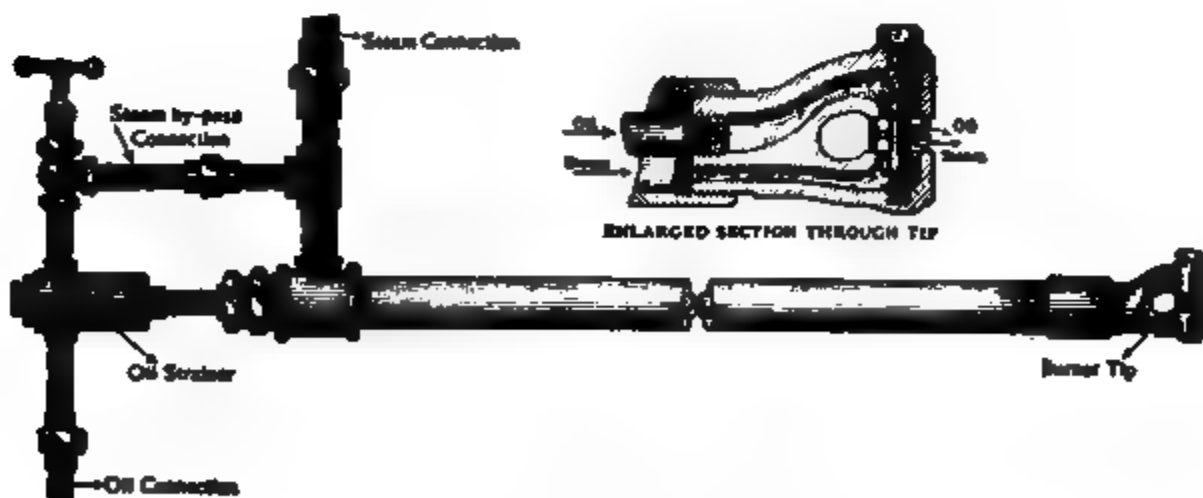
Flat-flame outside mixer oil burner. Babcock & Wilcox Company's "Peabody Back Shot No. 1."
